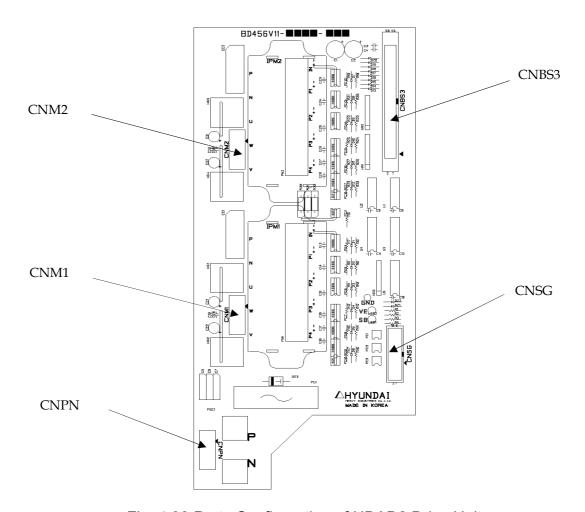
Parts Configuration of HDAD2 Drive Unit
